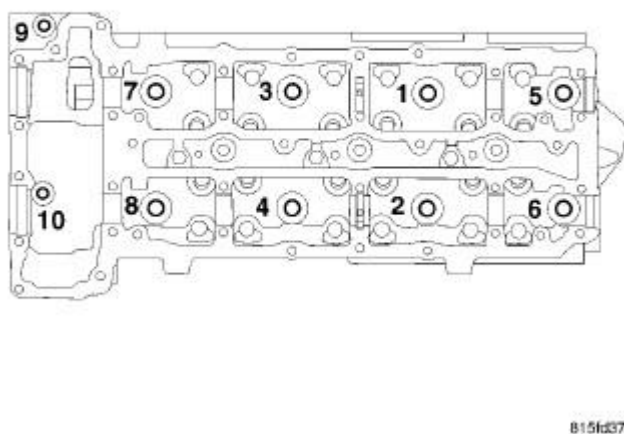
CYLINDER HEAD TIGHTENING SEQUENCE
